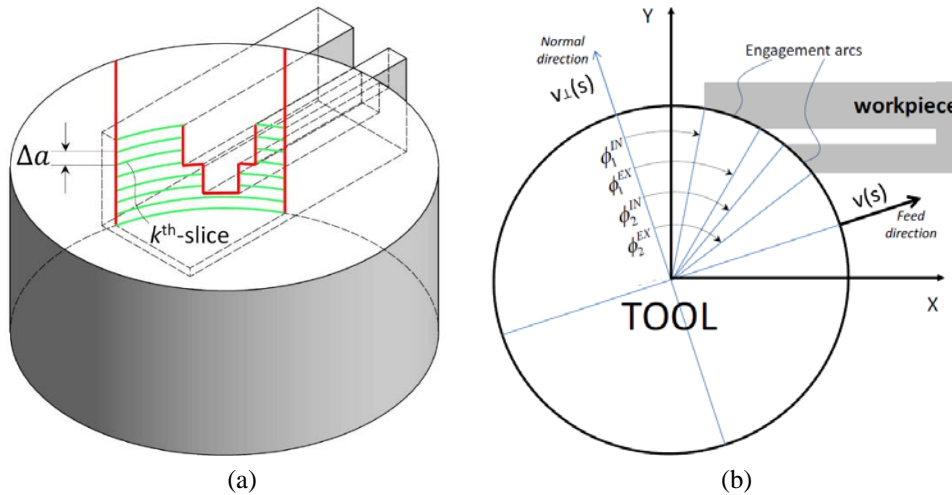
Slicing of the workpiece-tool intersection and engagement arcs definition.
